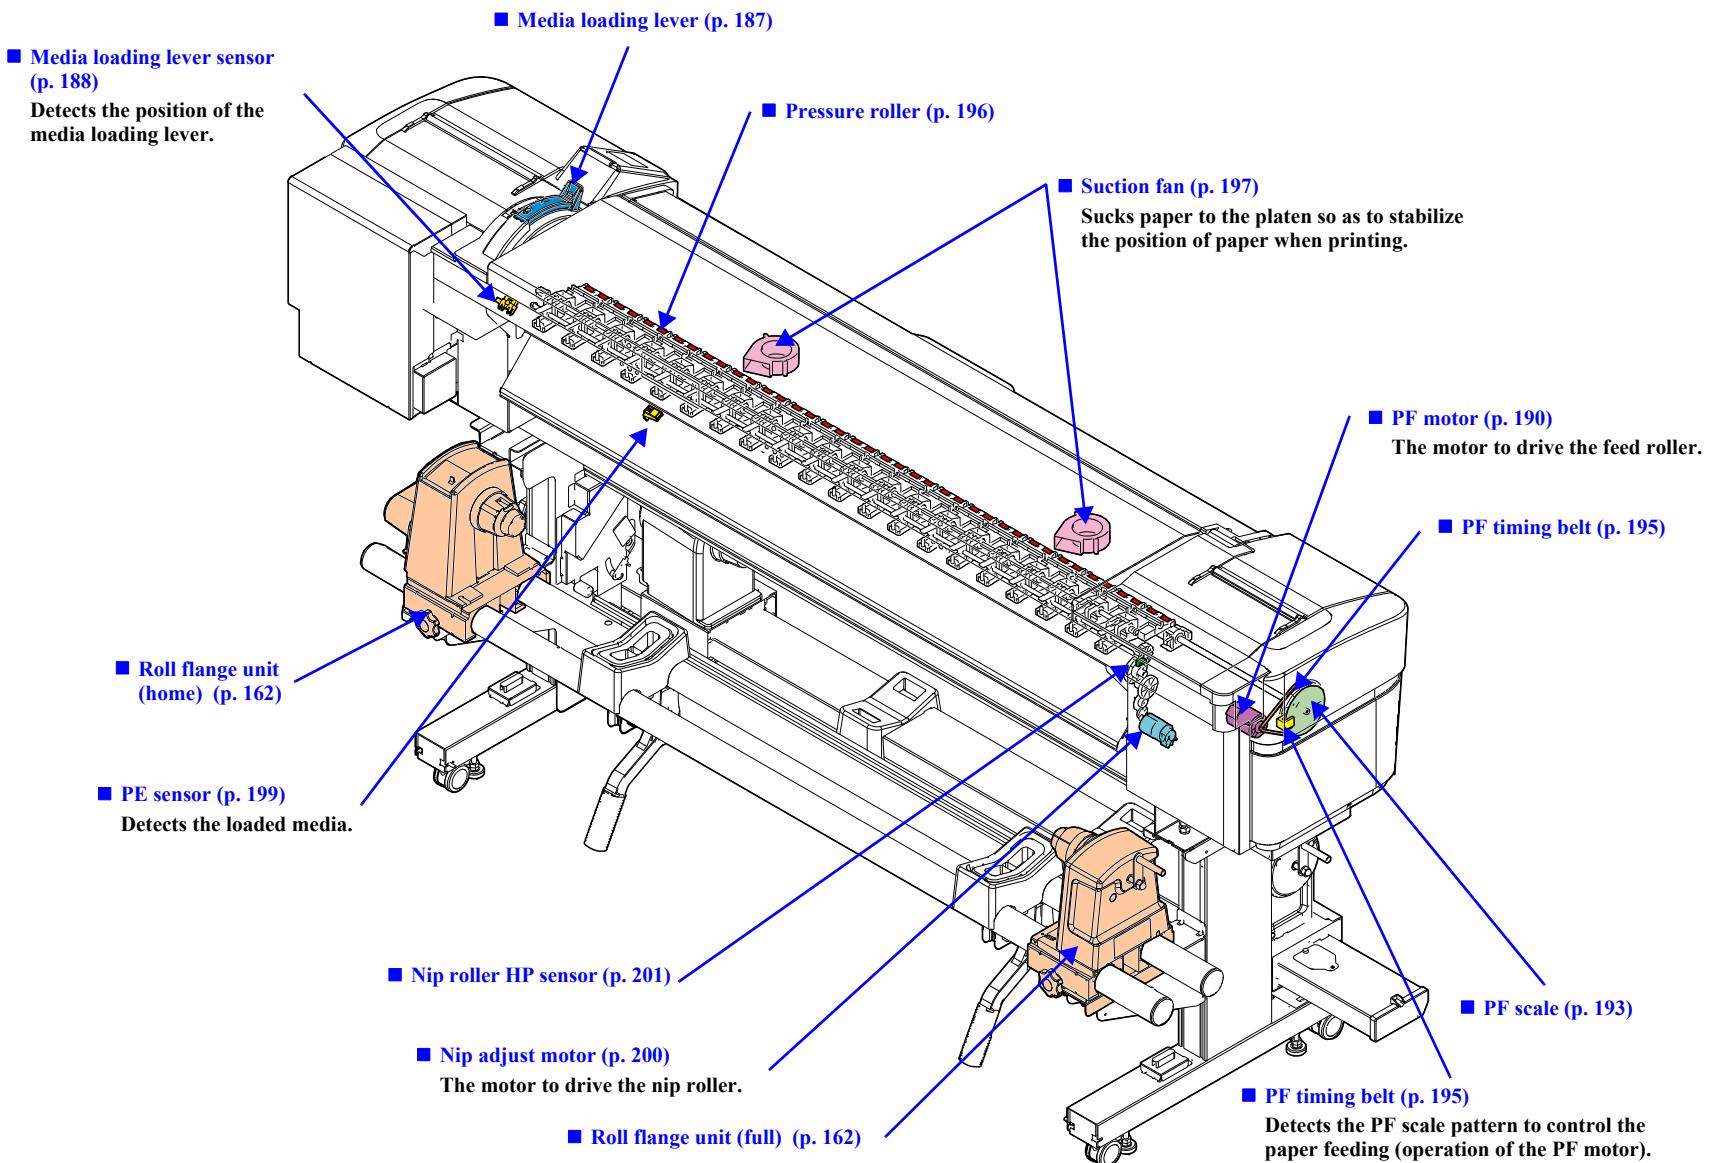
Paper Feed Mechanism/Roll Mechanism
